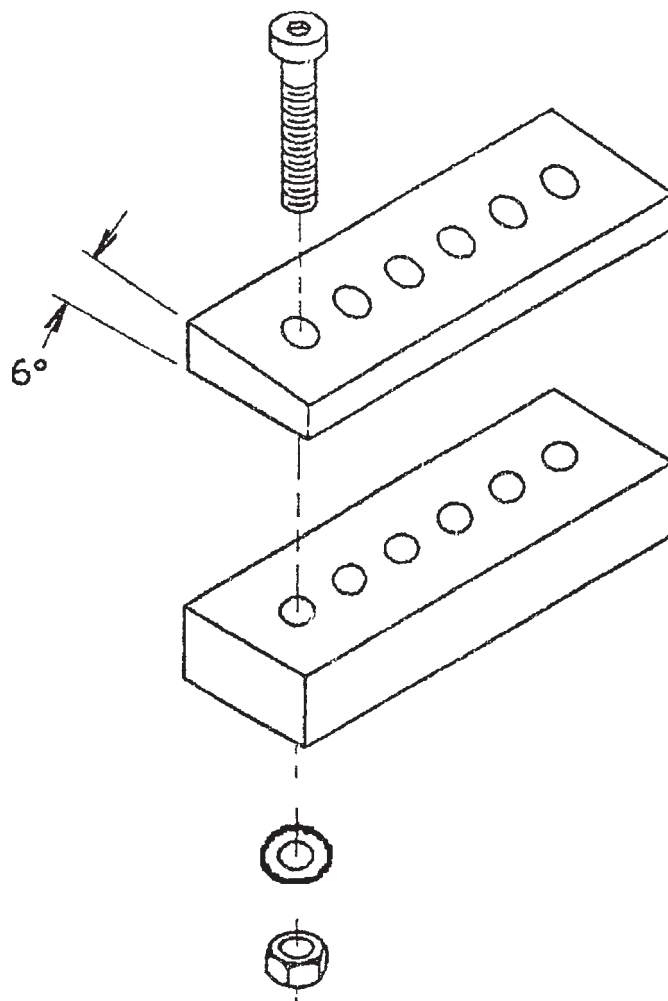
Example of 6° Wedge and Parallel Filler Plate
